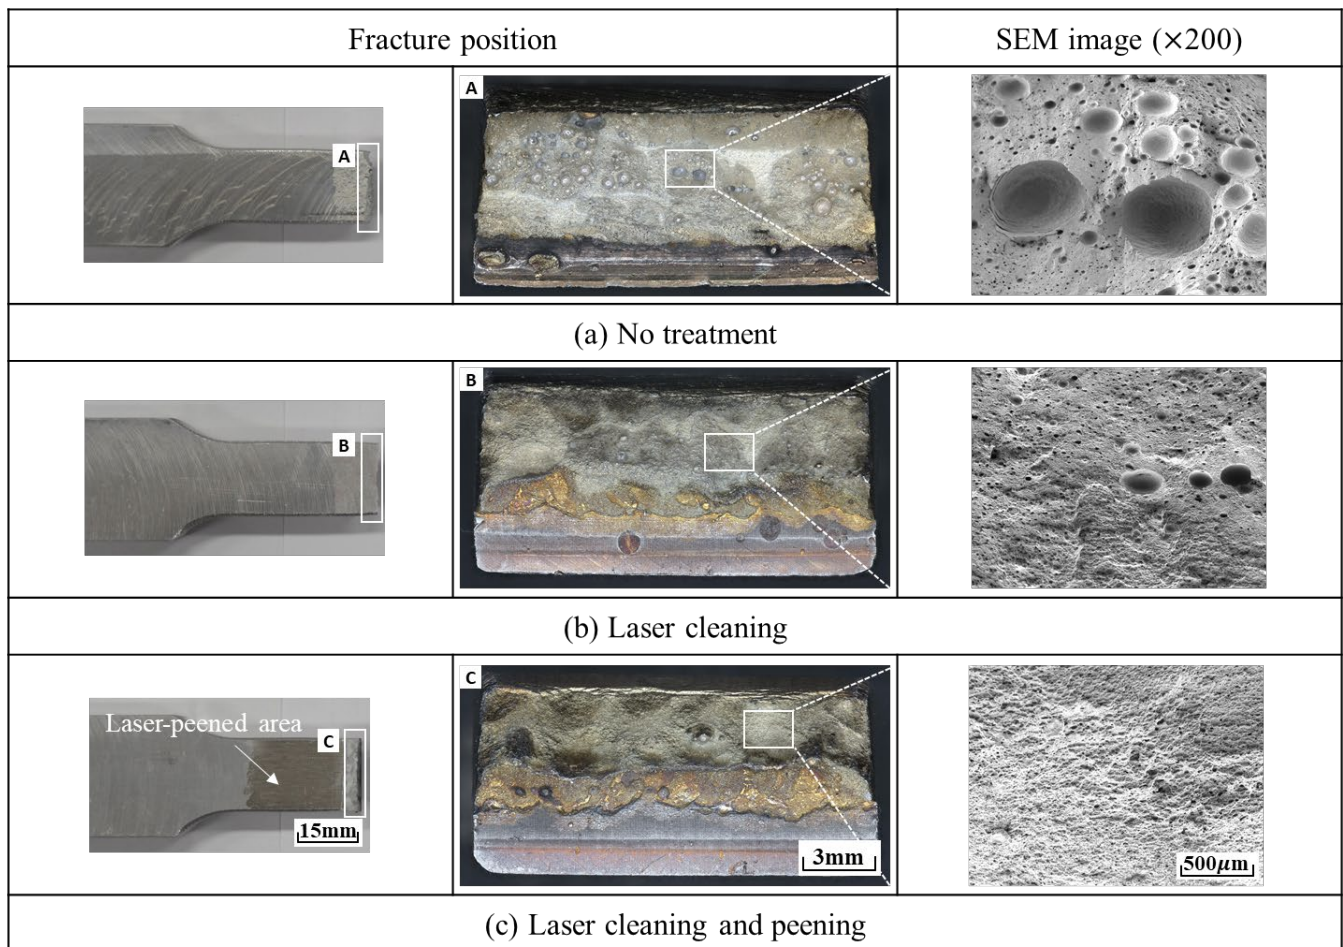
Fracture surface analysis of tensile test specimens by laser surface treatment.
